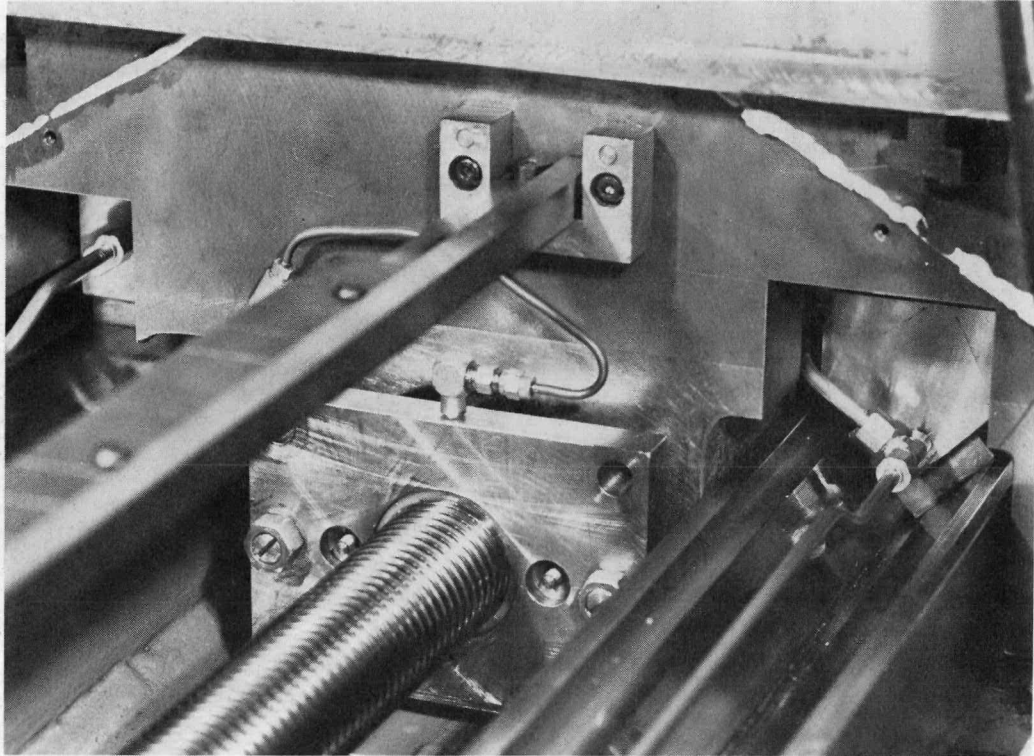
MACHINE TOOL WITH AIR BEARING SLIDE.
